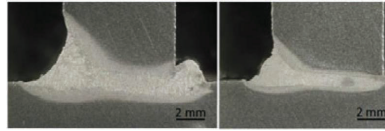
The change in weld geometry in respect to heat input. $P_L = 6$ kW, fpp = -2 mm, $v_w = 1$ m/min (left) and 2.5 m/min (right).
